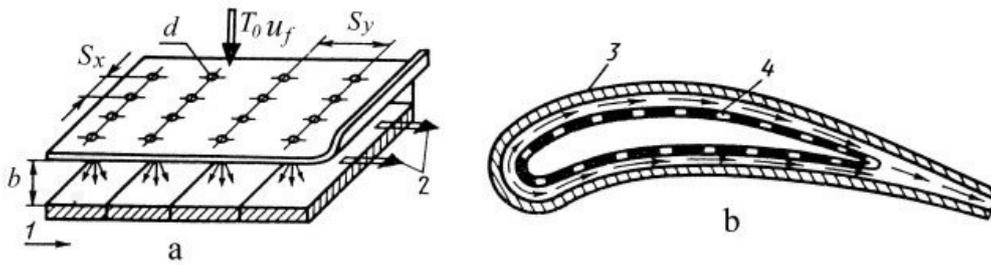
Jet cooling of the surface: a – jet cooling scheme; b – jet cooling of a gas turbine blade: 1 – high-temperature gas flow; 2 – coolant, 3 – outer casing; 4 – deflector
